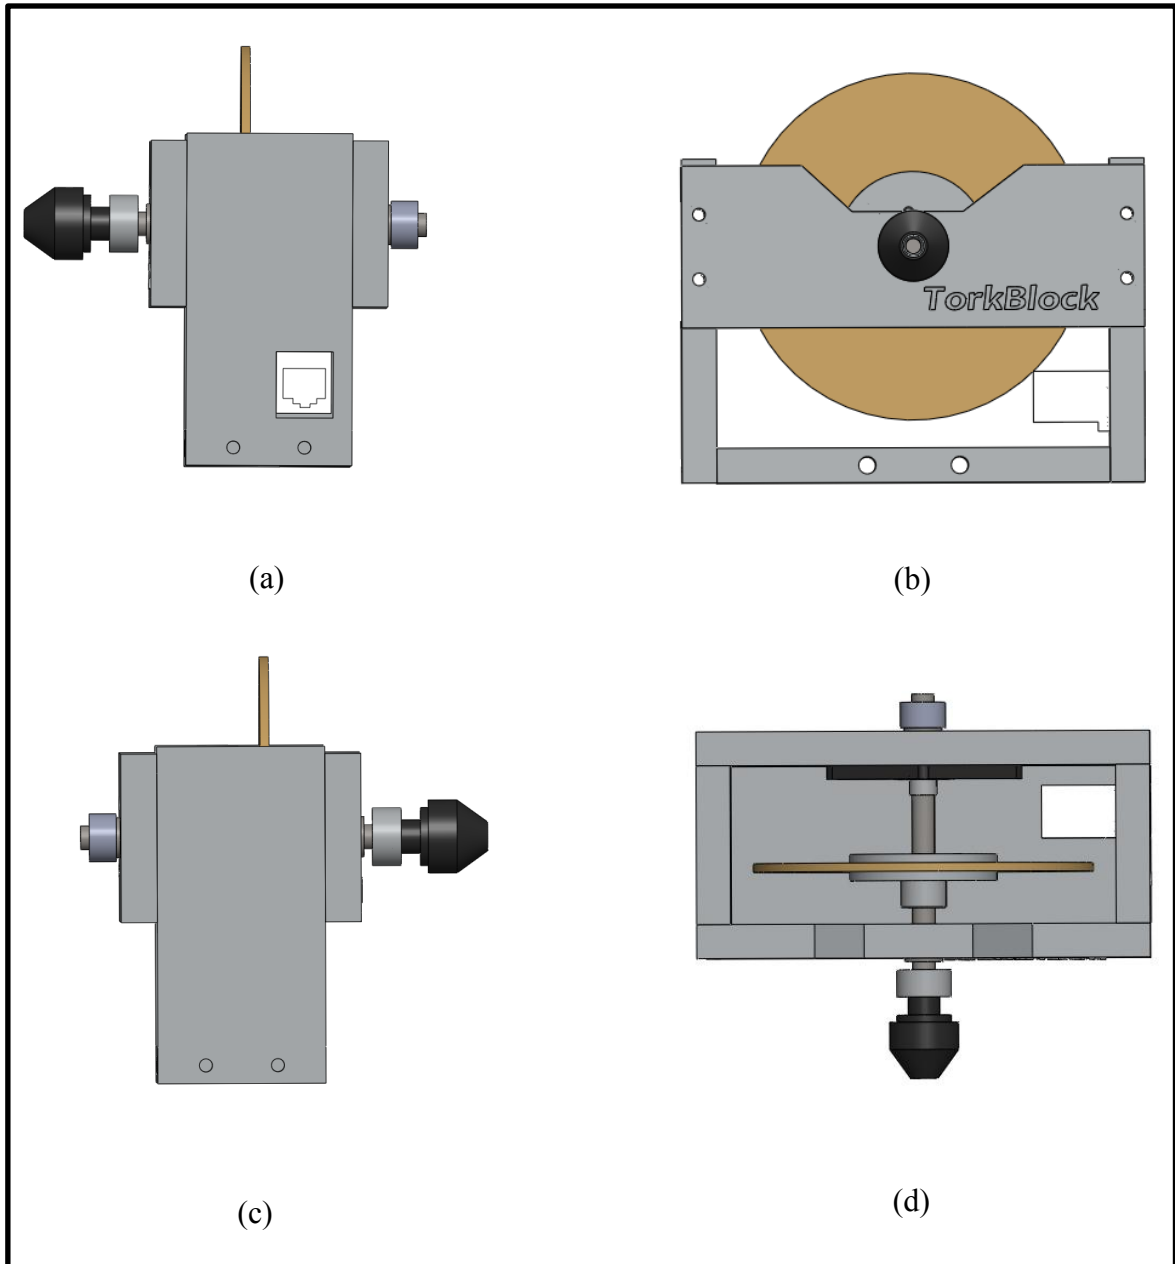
Final dynamometer design: (a) right view (b) front view (c) left view (d) top view. Created using SolidWorks®.
